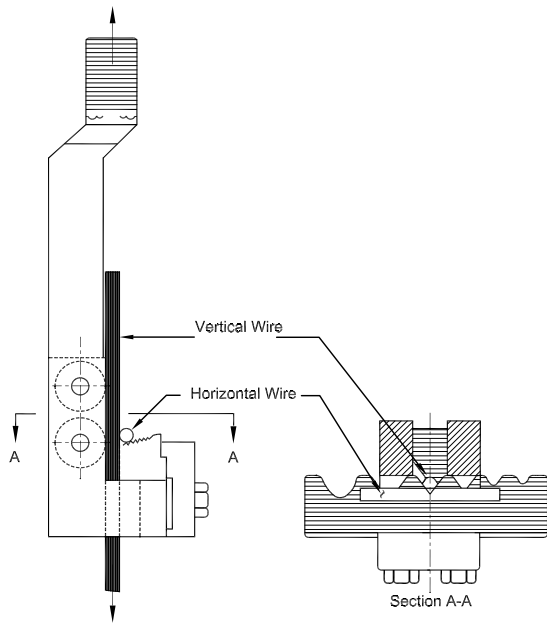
Welded Wire Reinforcement Weld Tester
